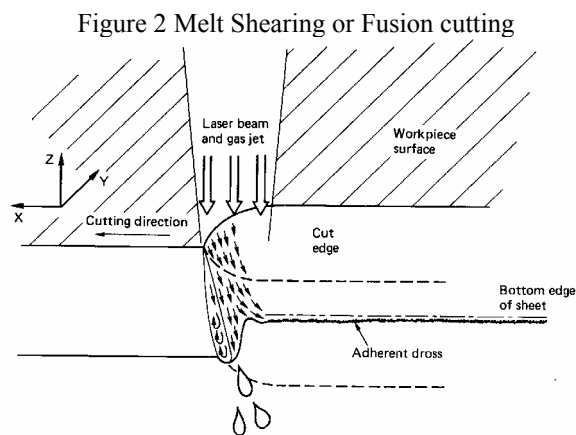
is a schematic of the process of melt shearing or fusion cutting. (Also referred to as ‘inert gas cutting’). [1] In this case the focused laser beam melts the workpiece and the melt is ejected from the bottom of the cut by the mechanical action of the cutting gas jet. Materials which are cut in this way include the majority of those that can be melted i.e. metals and thermoplastics. To laser cut these materials successfully we need to choose our cutting gas type and pressure carefully.
